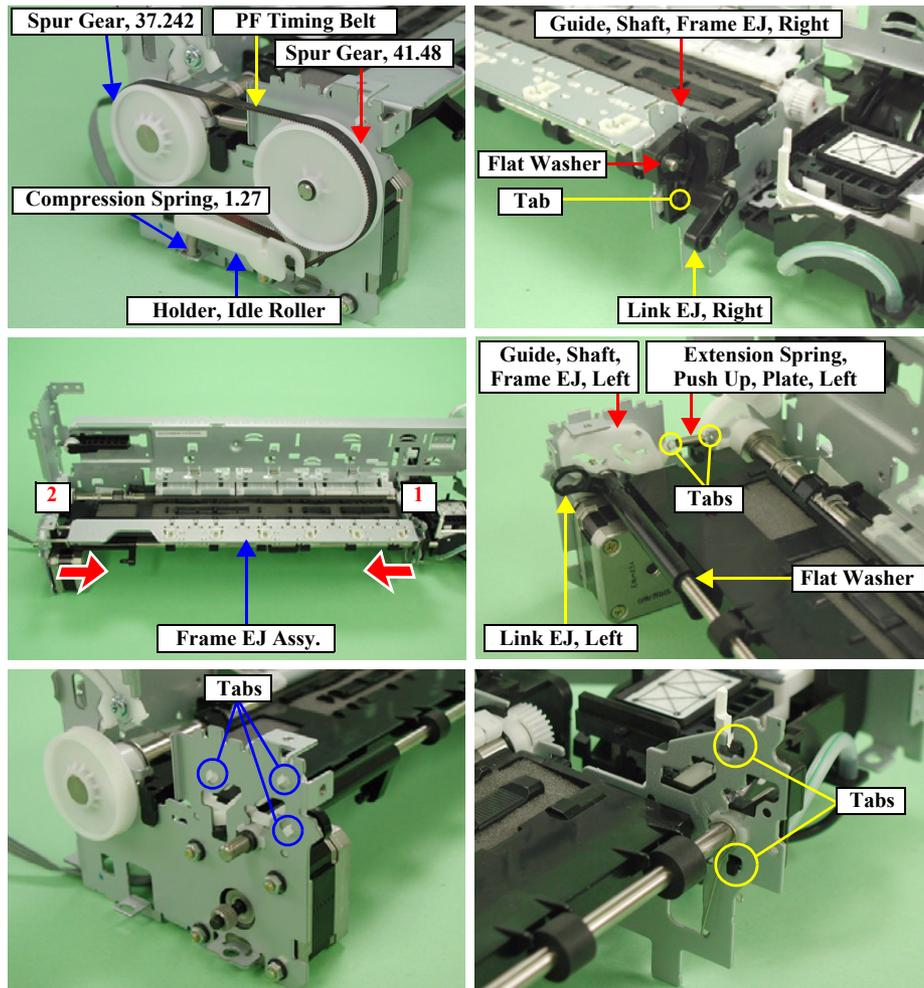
Paper Guide, Front/Roller EJ Assy. Removal (1)
